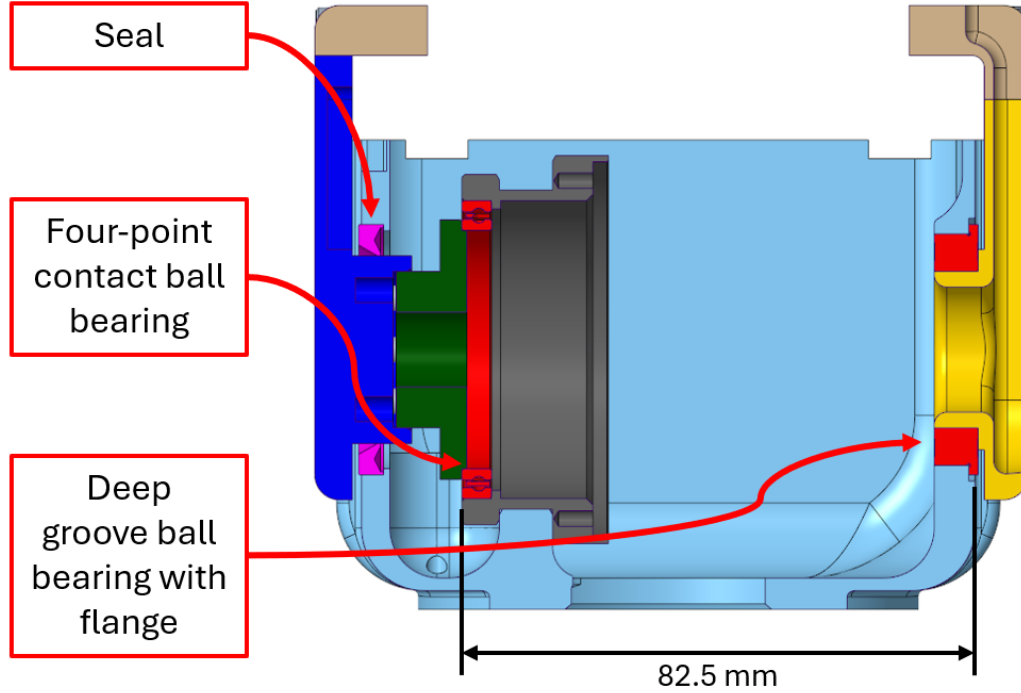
The bearing configuration of DAGANA. A four-point contact ball bearing is integrated into the actuator and an additional deep groove ball bearing is fitted on the cell structure. A seal protects the output of the actuator, which houses the link encoder (not shown), from dust and unwanted particles. Note that, for visual simplicity, only a few of the actuator's components are shown.
